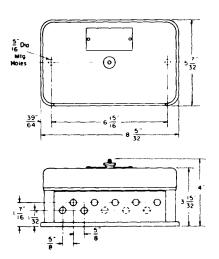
Dimensions of Types MC-21 and MC-22 phase-shifting transformers
